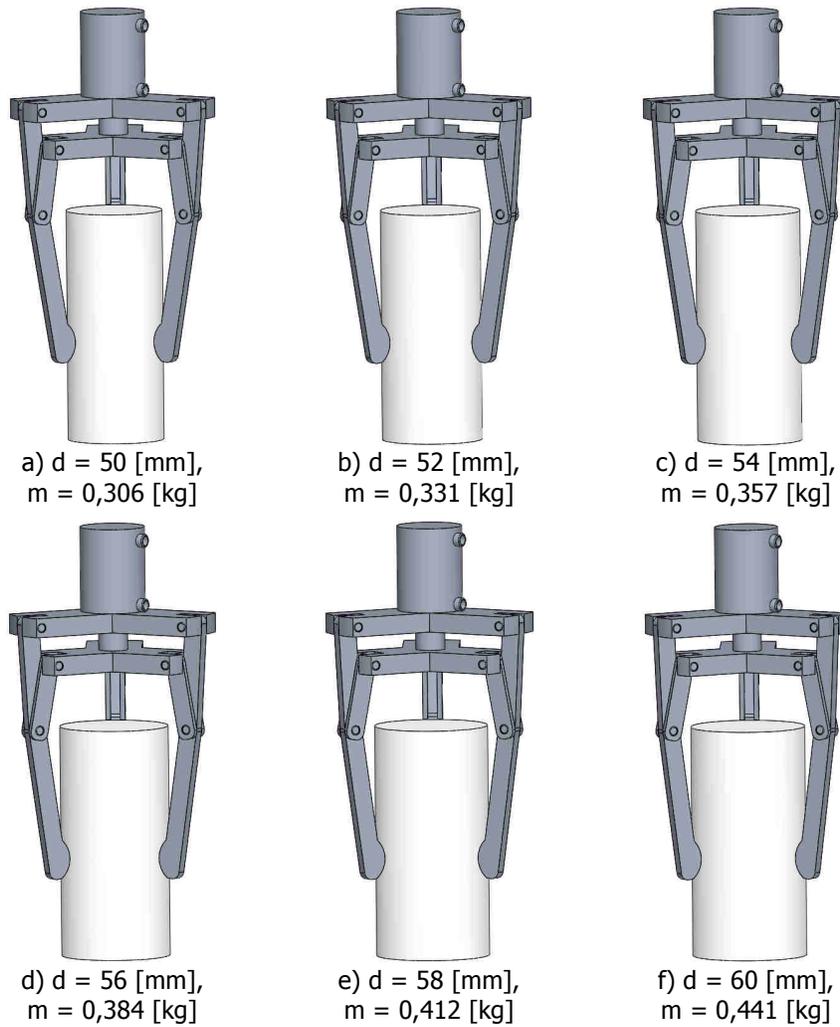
Cylindrical workpieces of the same length, but with different diameters, grasped by the gripper.
